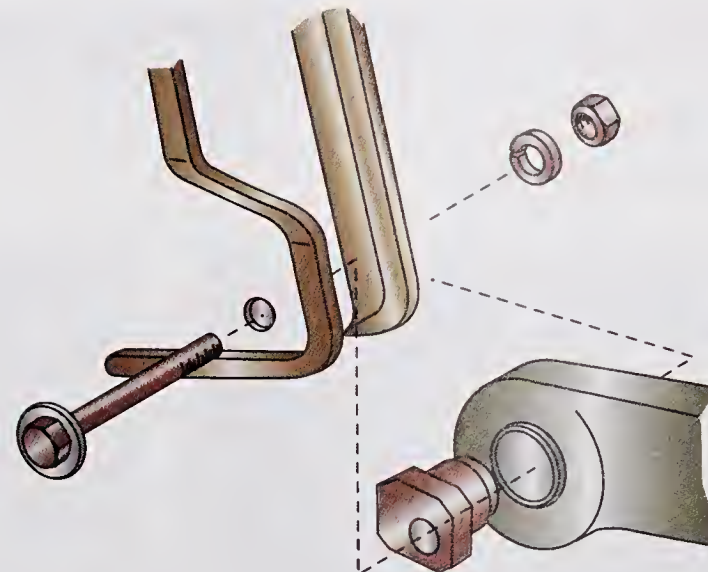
Aftermarket bushing kit to adjust rear wheel toe and camber.
